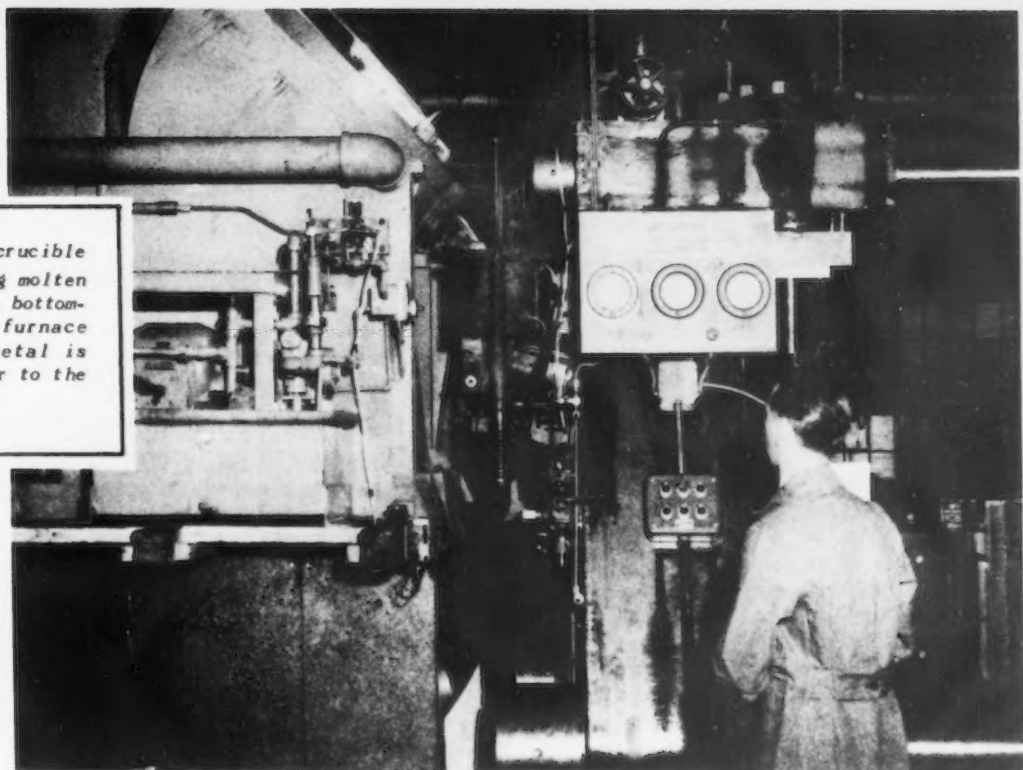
This hydraulic cold chamber diecasting machine which develops a 1000-ton clamping pressure is automatically fed from the tilting crucible furnace at the right.
